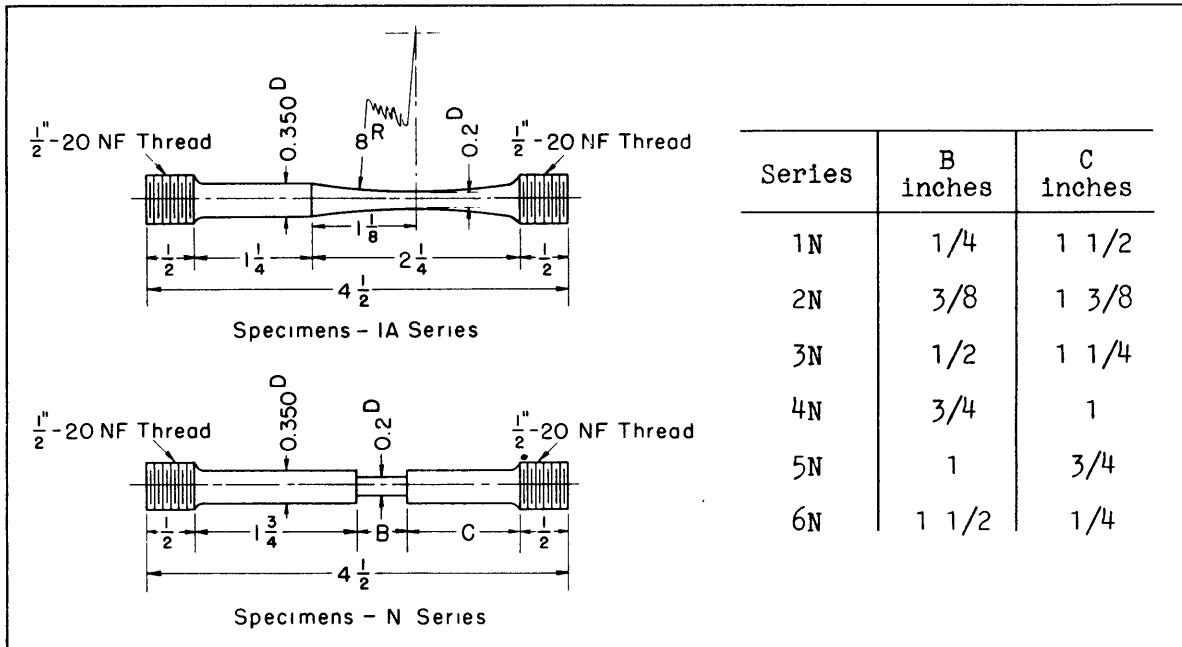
Detail of Specimens used in 1941 MIT Tests
